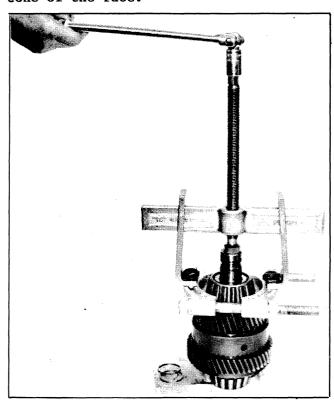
Pulling the Rear Bearing Cone from the Reverse Clutch Shaft.
